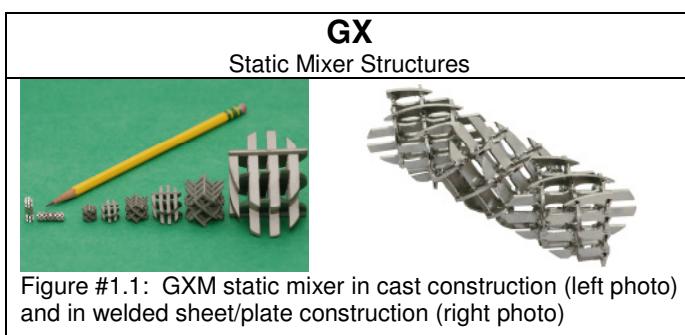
GXM static mixer in cast construction (left photo) and in welded sheet/plate construction (right photo)
